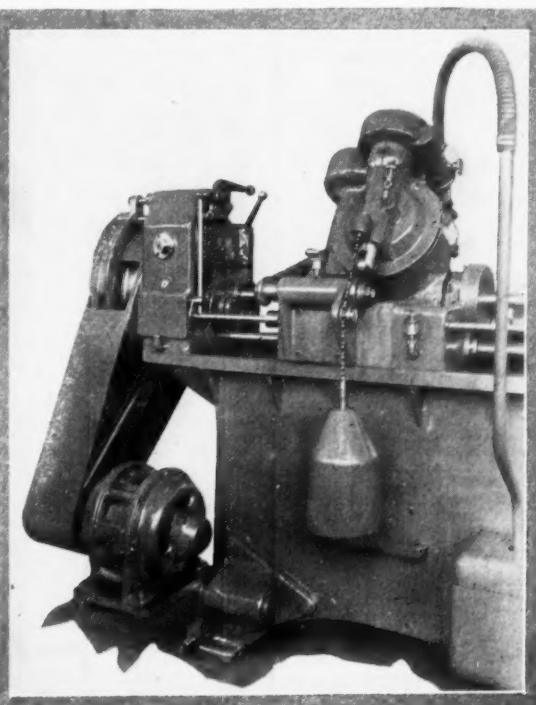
Close rear view showing simple and convenient arrangement for motor drive
